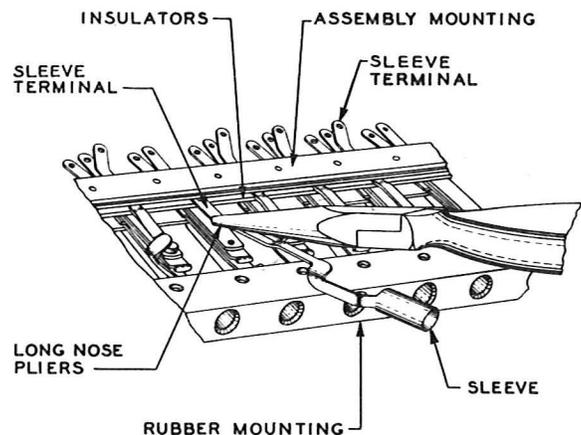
Method of Forcing Sleeve Terminal into Assembly Mounting in 92- and 292-type Jacks
